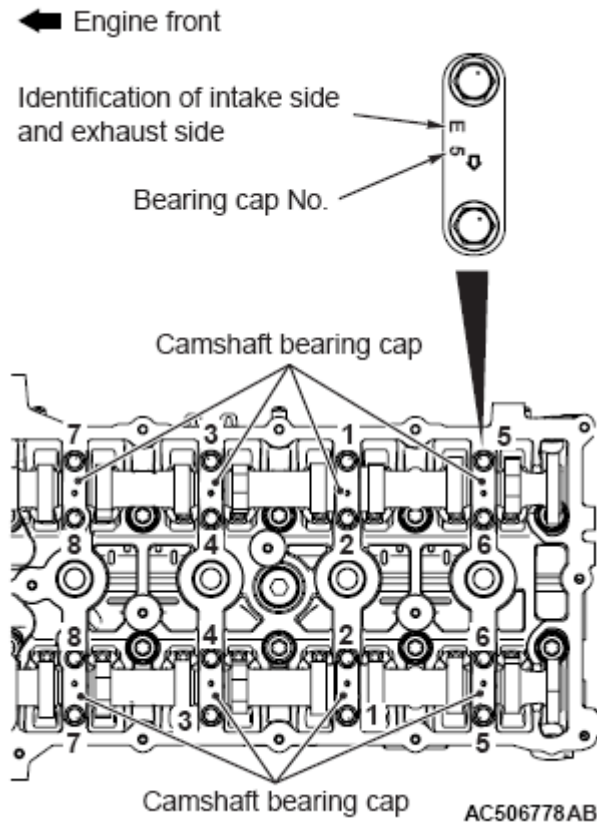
Identifying Tightening Sequence Of Camshaft Bearing Cap Bolts
